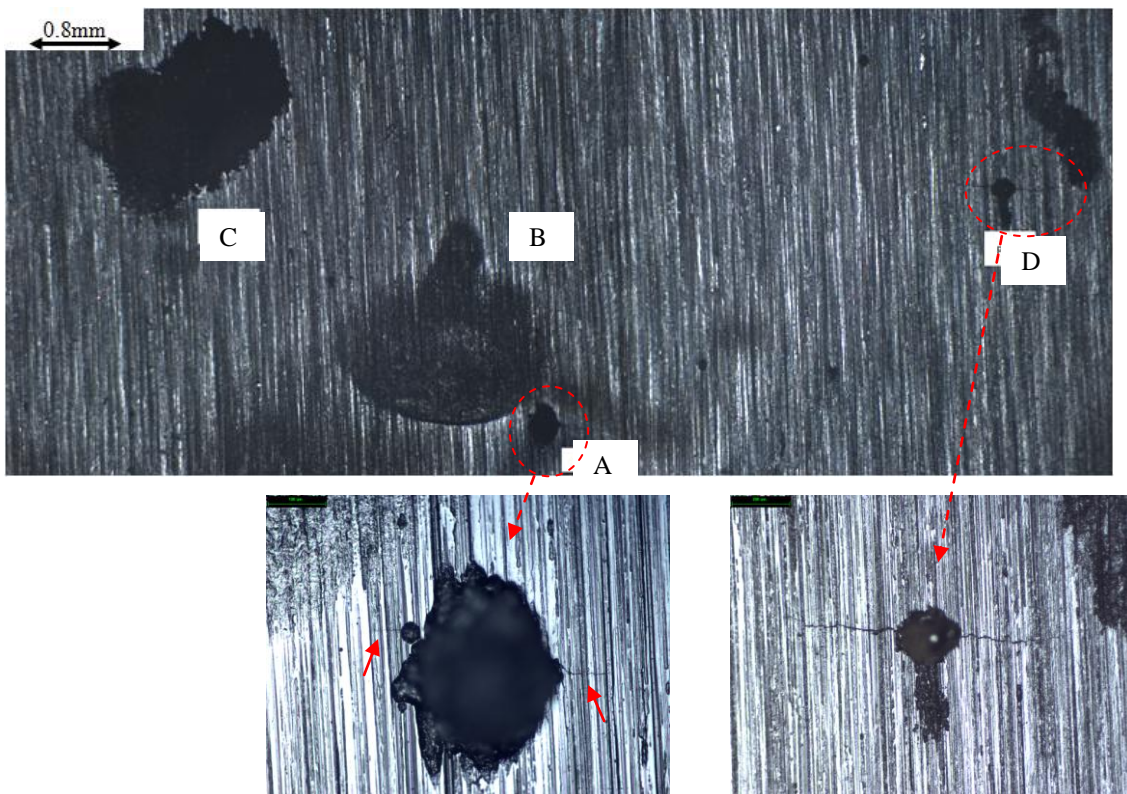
Specimen 17 – Replica taken after 5000 cycles, cracks initiating from flaws A and D
